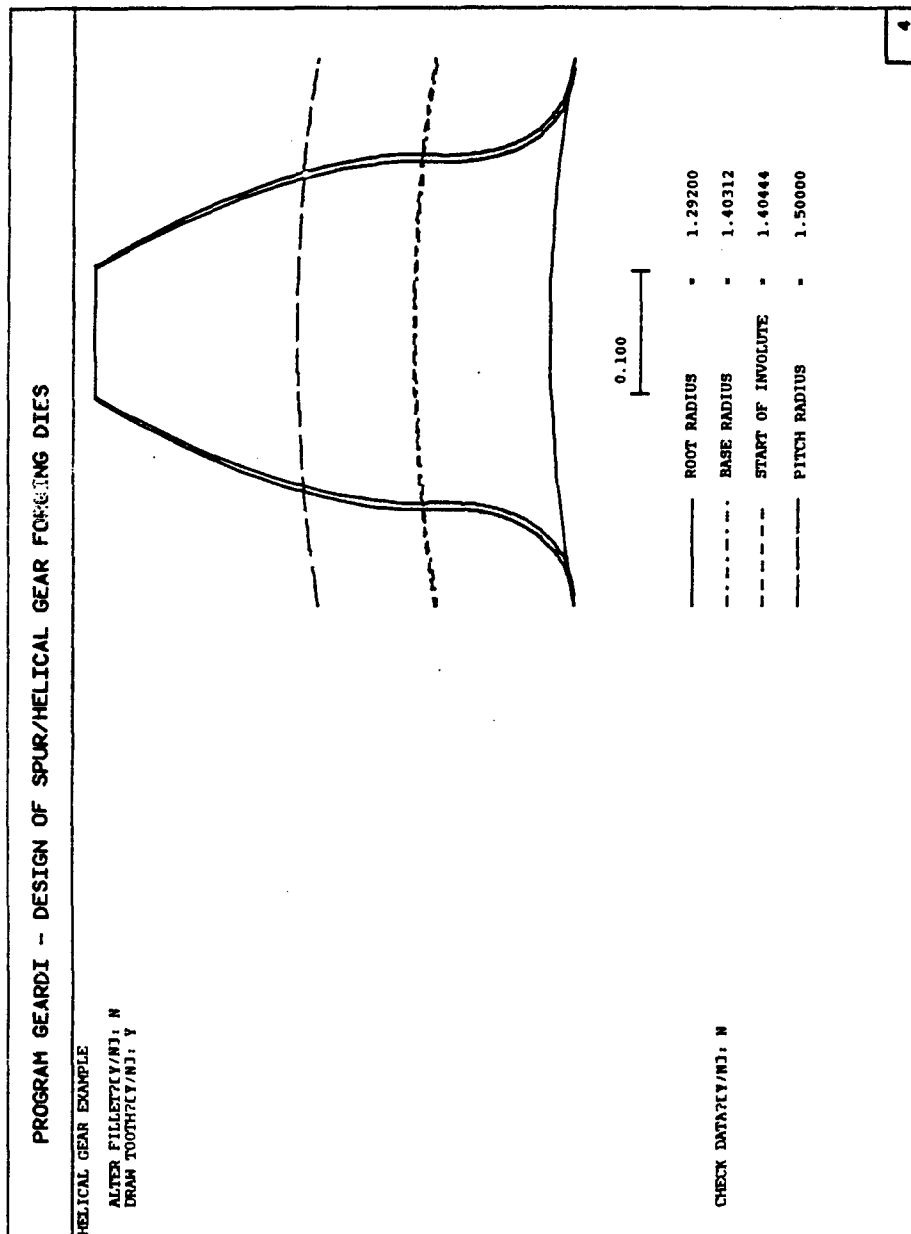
Helical Gear Example; Tooth Profile Display
